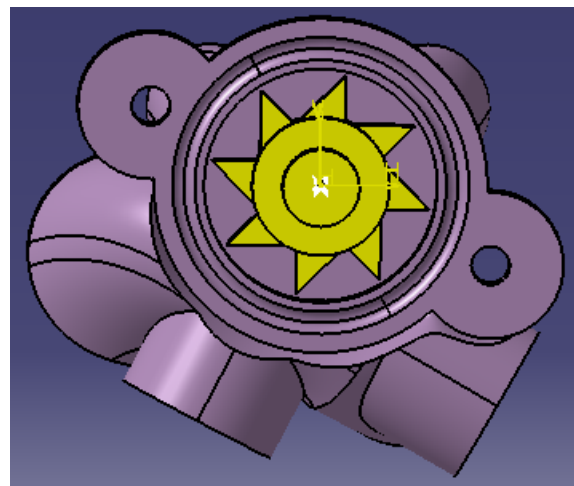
, CAD drawing of air drill with no top (Grindley, 2014)
